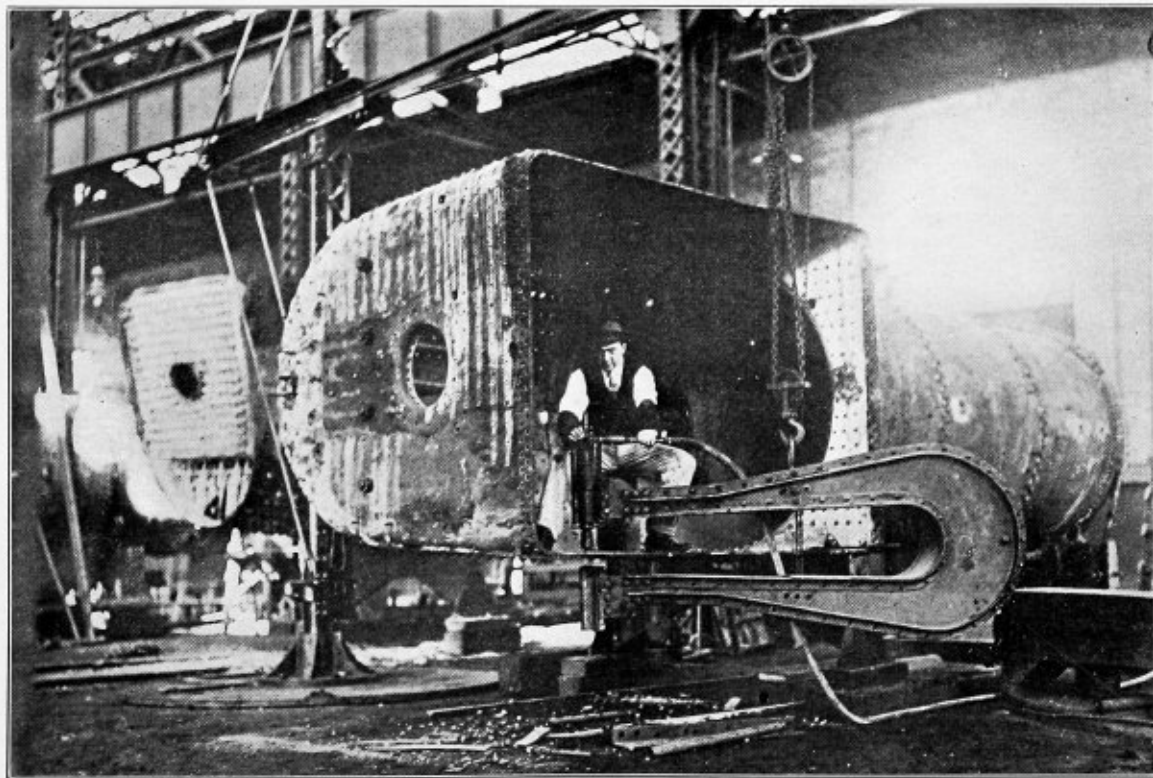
YOKE RIVETER USED FOR KNOCKING BURRS FROM STAY-BOLT HOLES.
